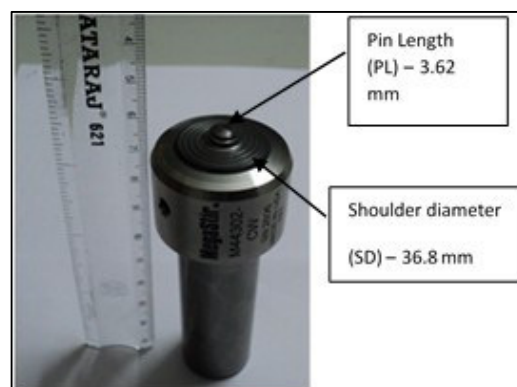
Megastir Q70 (PCBN/WRe) Tool.
